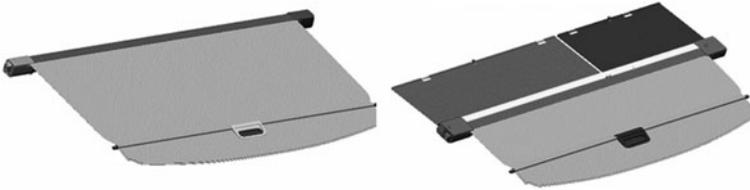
Example of skirt shaped and rollable parcel-trays: Left: with a fixed rear seat; right: with a sliding and split rear seat.
